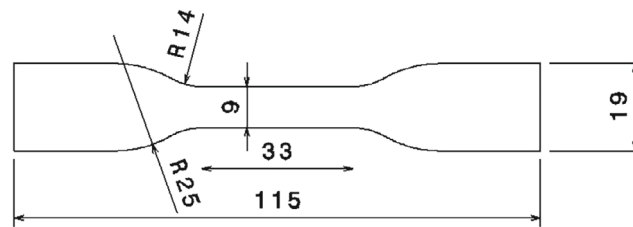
Specimen dimensions thickness $T = 2$ mm.
